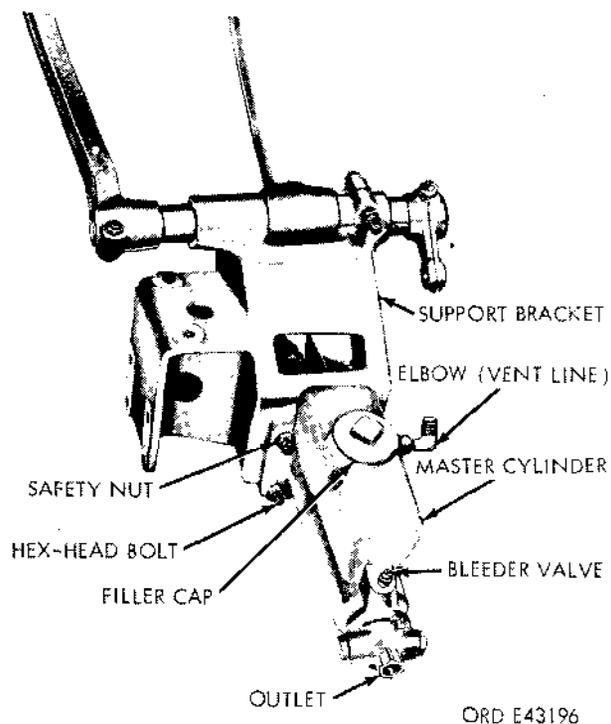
Brake master cylinder with pedal and linkage attached.
